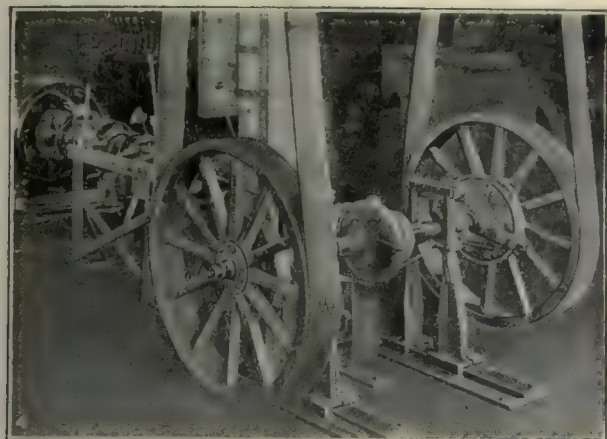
TESTING AXLES UNDER LOAD. FIG. 5—FINAL TEST OF COMPLETE CHASSIS
